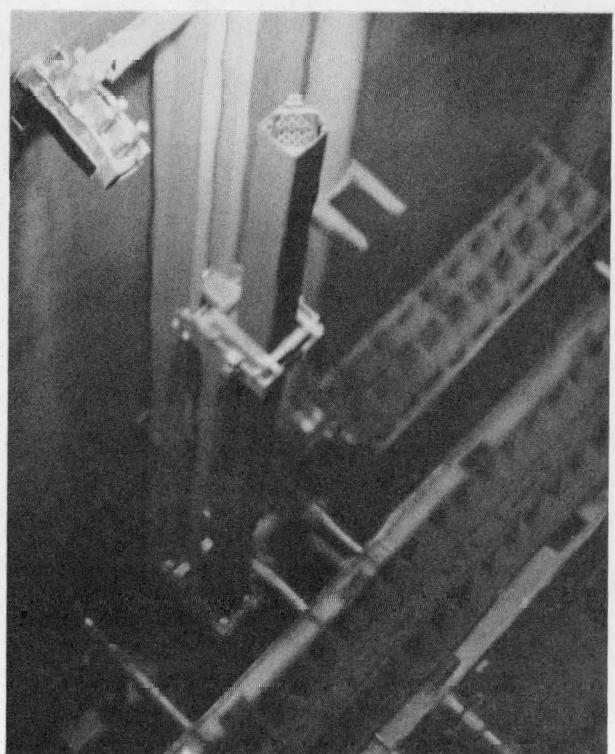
Equipment and Fixtures for Lower Tie Plate Drilling by EDM (Browns Ferry)
